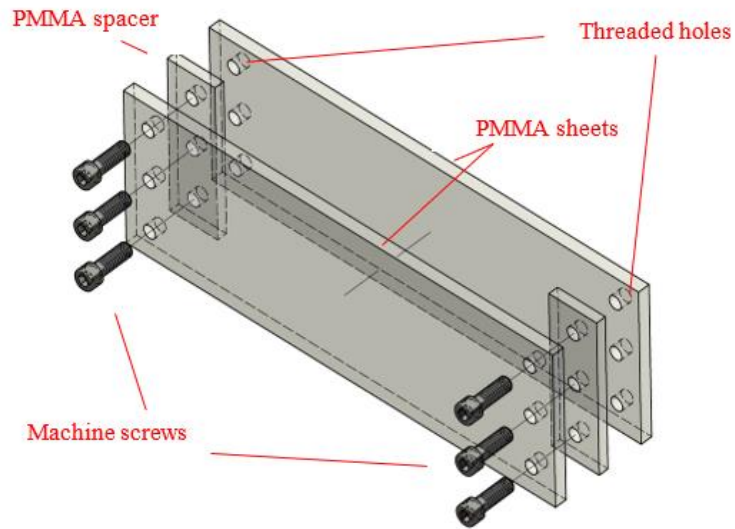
Schematic of a mold used for casting glass-filled epoxy composites
